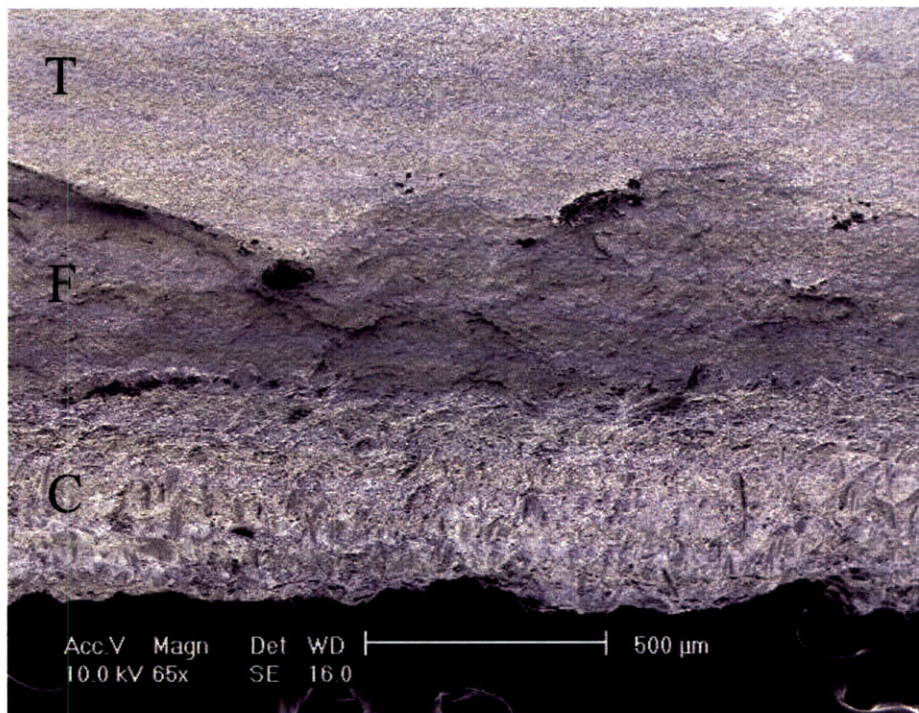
Edge of waterjet-cut tungsten piece: T, top surface; F, fractured surface which was chipped away during waterjet cutting; C, cut surface, parallel to jet. CNT growth is observed on cut surface.
